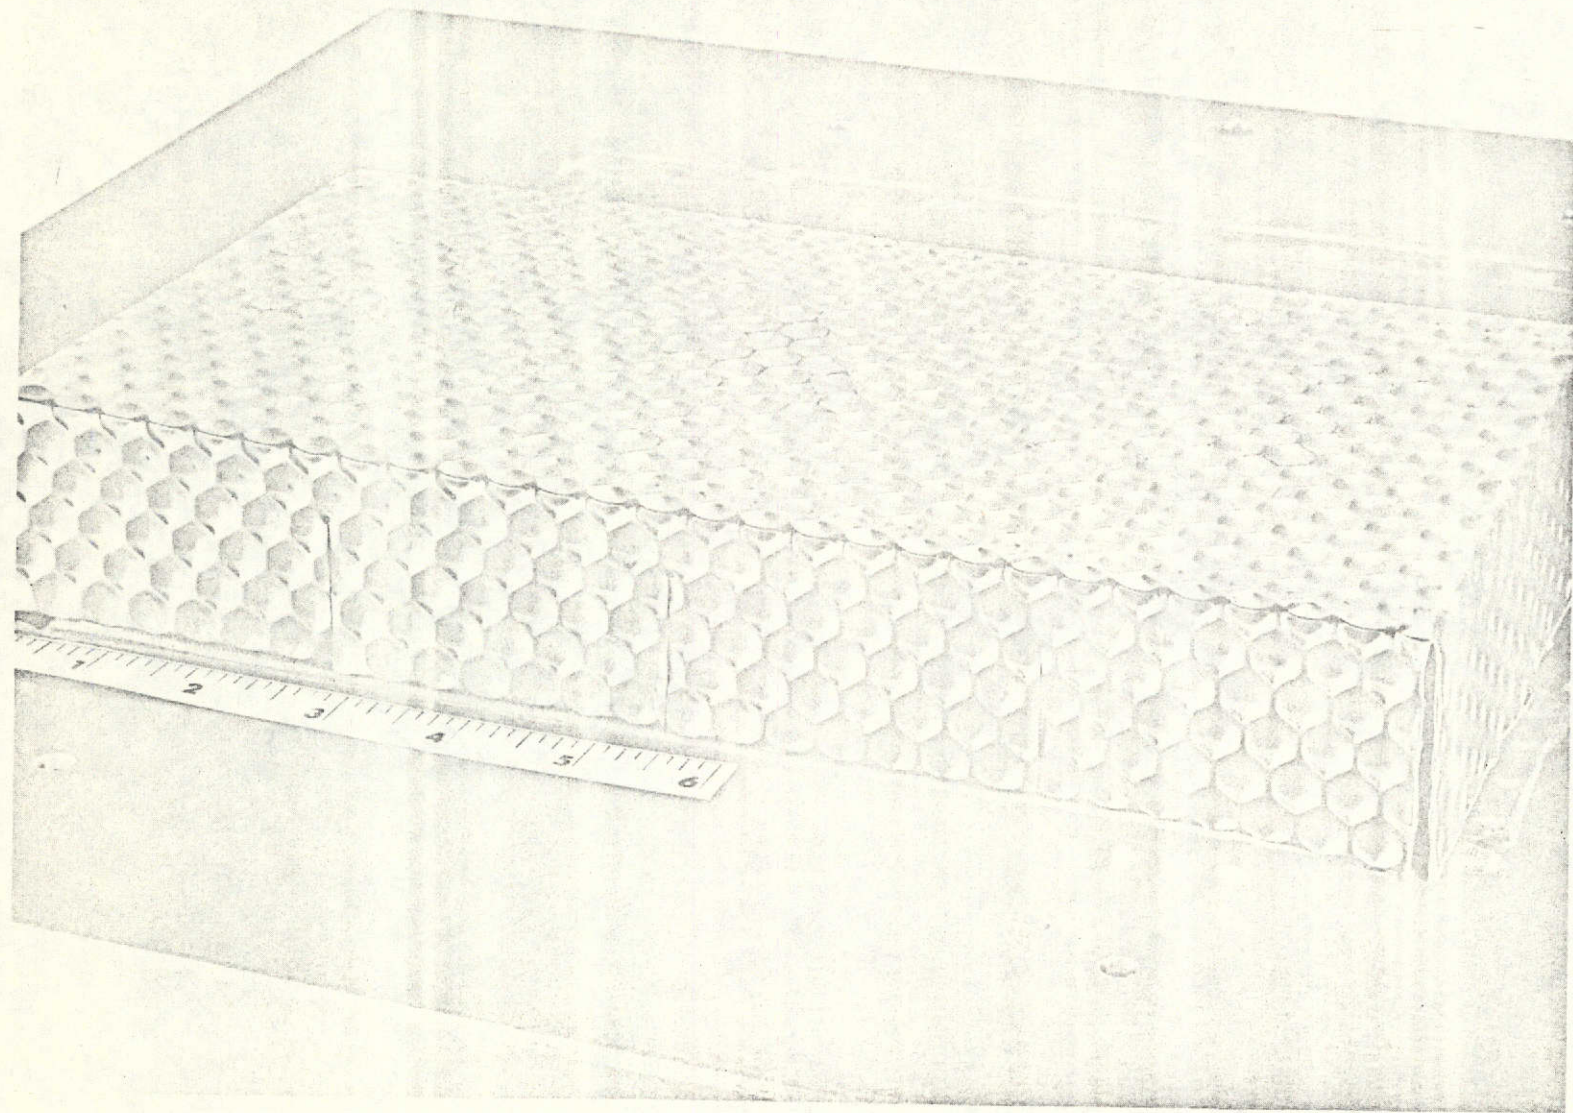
PLEATED SIDE DESIGN (SPECIMEN 11)
